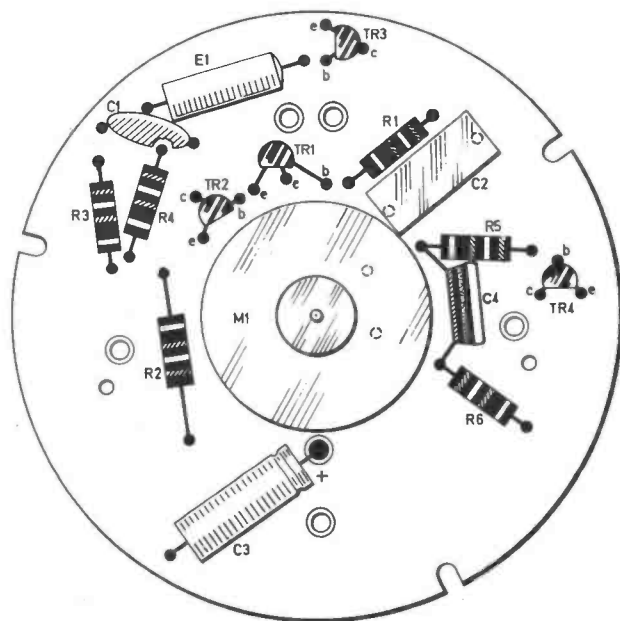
Top view of circuit board (Fig. 10) with components in position.
